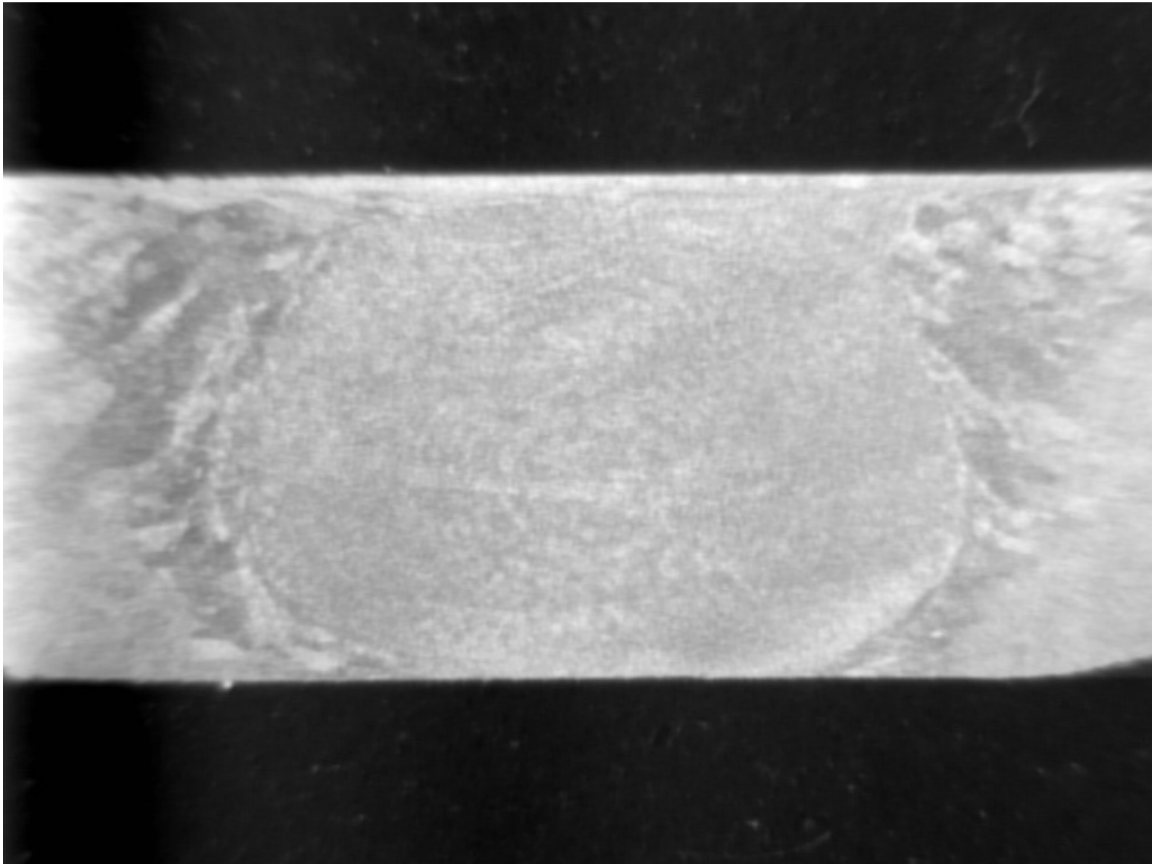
Zoom view of a macro taken from a full penetration butted pipe weld (1400rpm, 5.2ipm). The experimental tools had a 5/8” diameter, scrolled shoulder and 0.18” length, threaded probe. The wide (0.236” diameter) probe tool created this weld.
